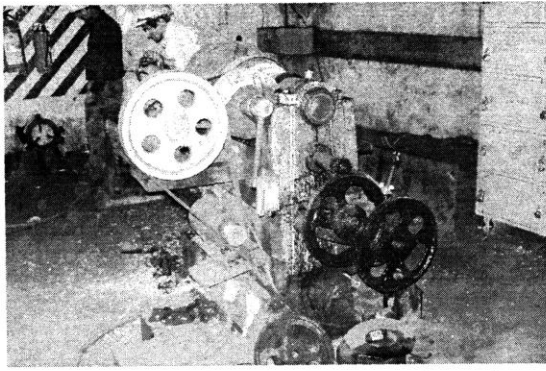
Examples of unguarded dangerous machine parts (hazards). They need guards.
